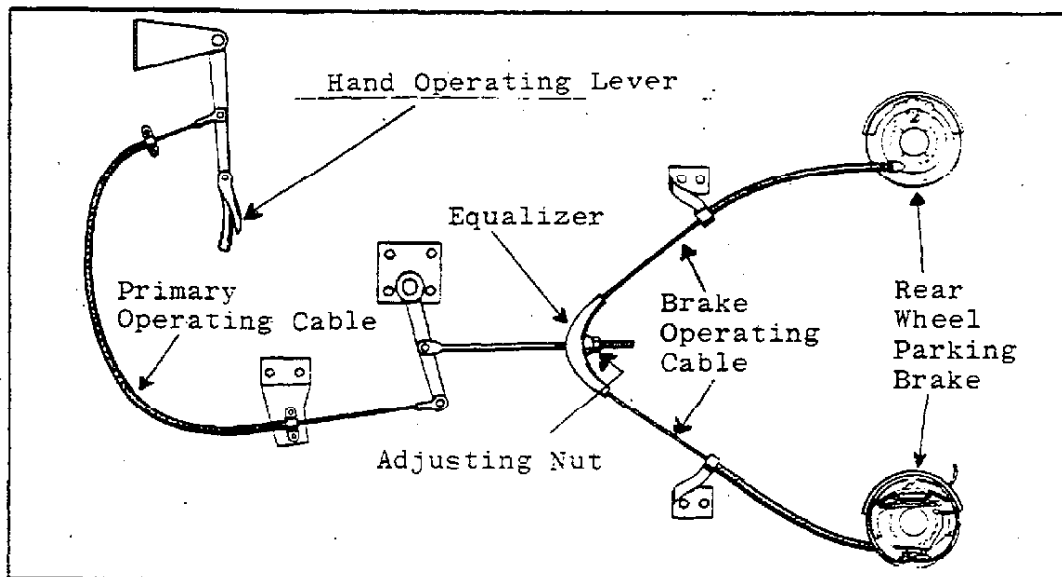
Integral Type Rear Wheel Parking Brake
